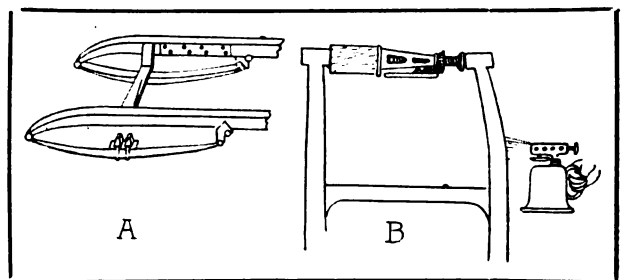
A, Repairing Cracked Frame; B, Straightening Bent Frame with Jack and Blow Torch.
